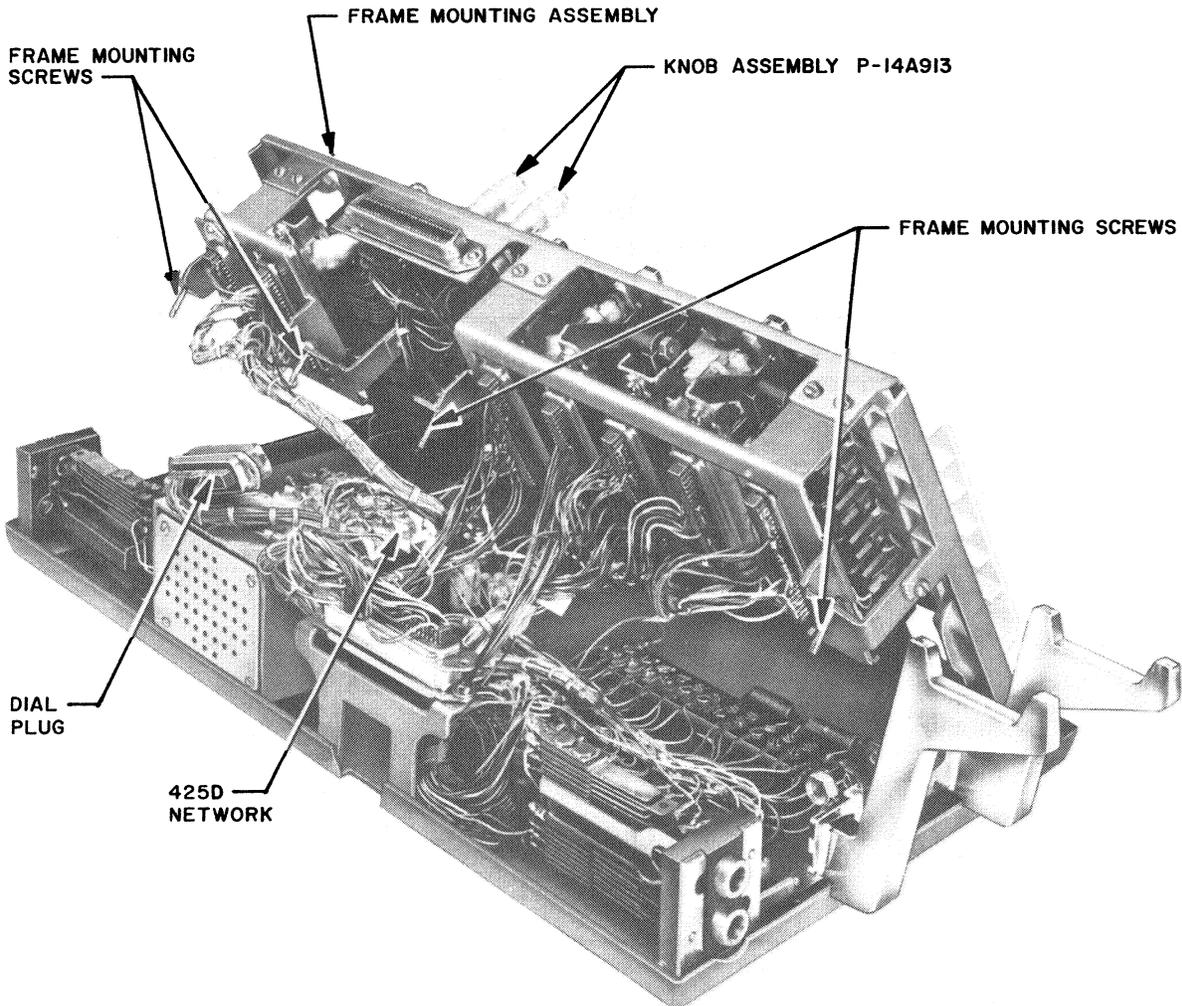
1A-Type Telephone Console, Frame Mounting Assembly Raised
